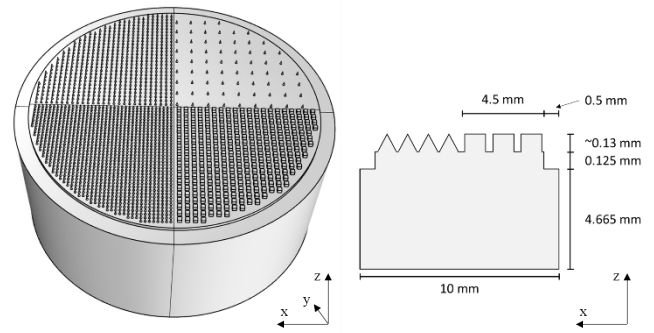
CAD model of the molding tool (left). Dimensions of four different structures (right).
